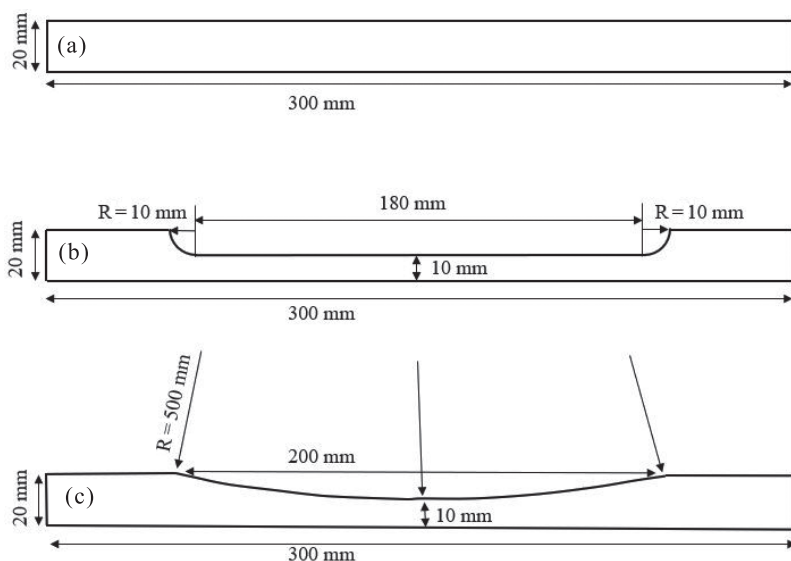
Side view of wood specimen; (a) rectangular type, (b) marimba type, (c) xylophone type.
